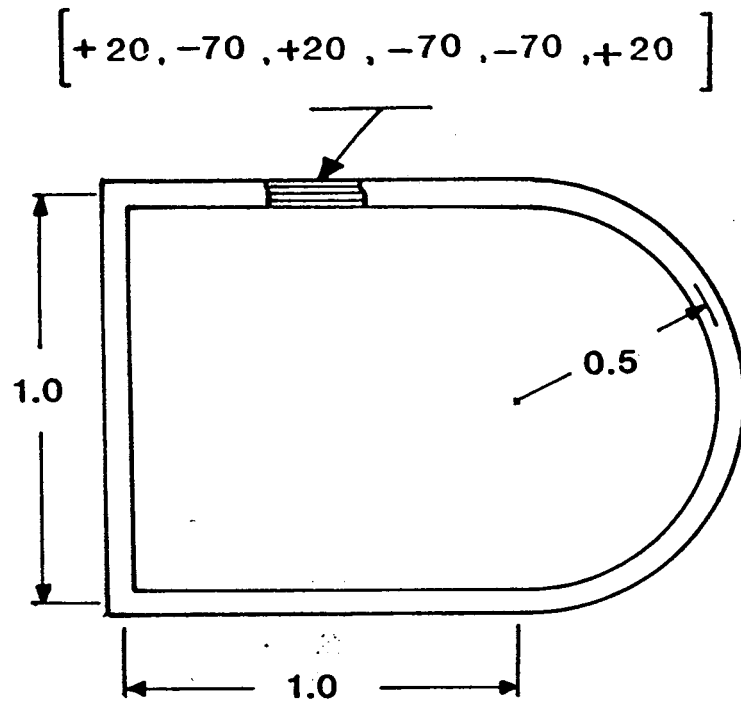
SINGLE CELL BEAM CROSS SECTION
